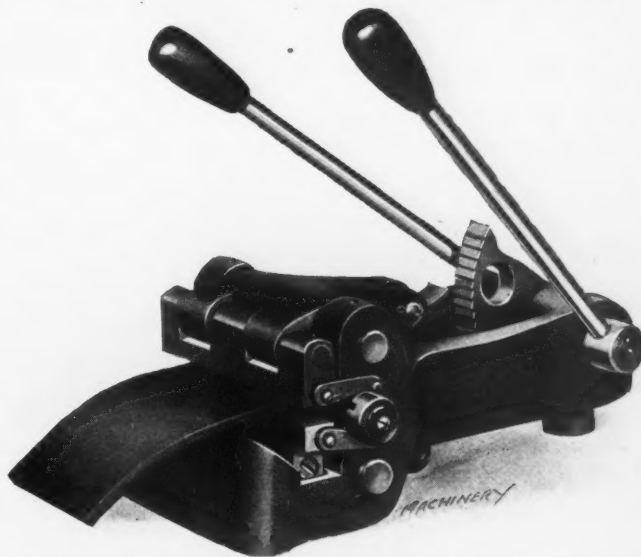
"Bulldog" Closing Machine for lacing Belts with "Bulldog" Lacing
